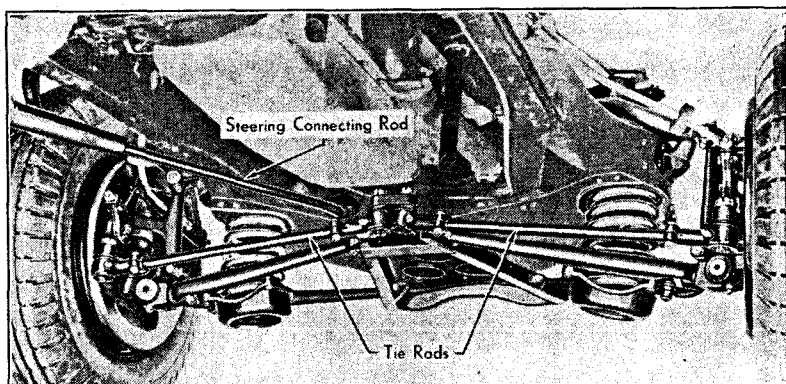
Two tie rods are used on all cars to connect the intermediate steering arm to the steering knuckle arms. When adjusting toe-in, both tie rods must be adjusted to bring the rear end of the intermediate steering arm at the center of the car with the front wheels in the straight-ahead position.
